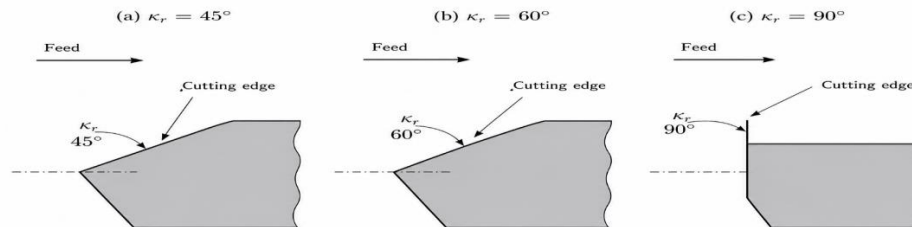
Geometry of HSS cutting tools with principal cutting edge angles (κ_r) of 45°, 60°, and 90°.
